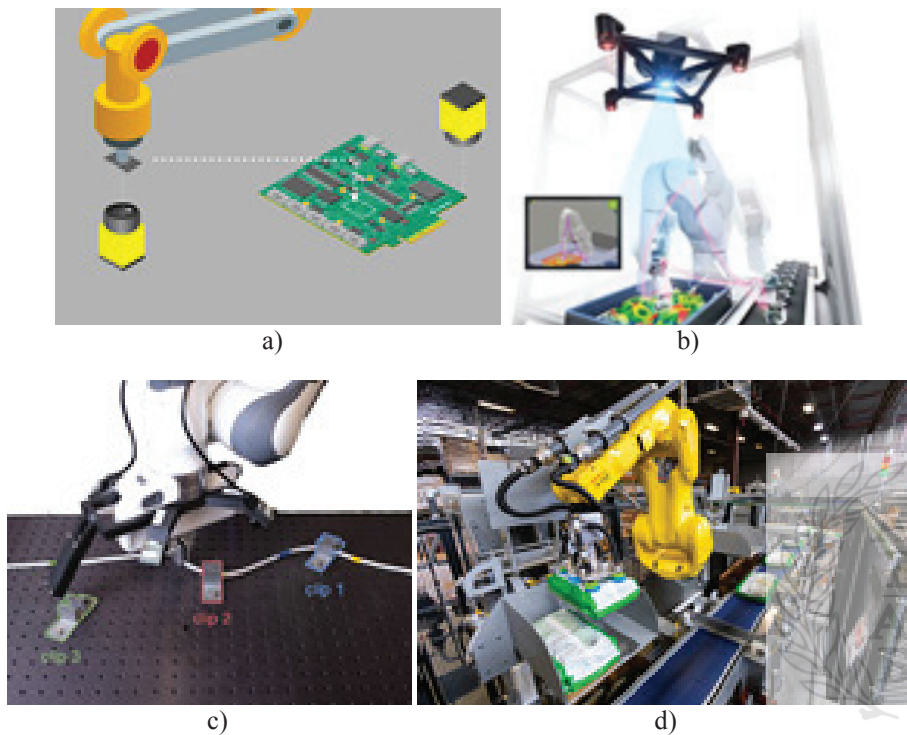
Puzzle inspired scenarios – industrial analogues. a) PCB component placement guidance – semiconductor manufacturing and printed circuit board, b) Bin picking – 3D vision-guided robotics (Keyence), c) Cable routing system, d) Multi-line robotic packing system – Pearson packaging system
